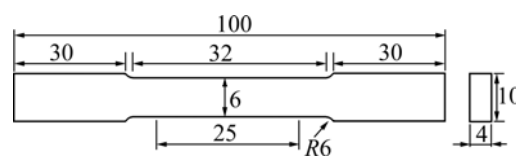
Dimensions of tensile specimen proportional to ASTM E-8M standard (mm)
